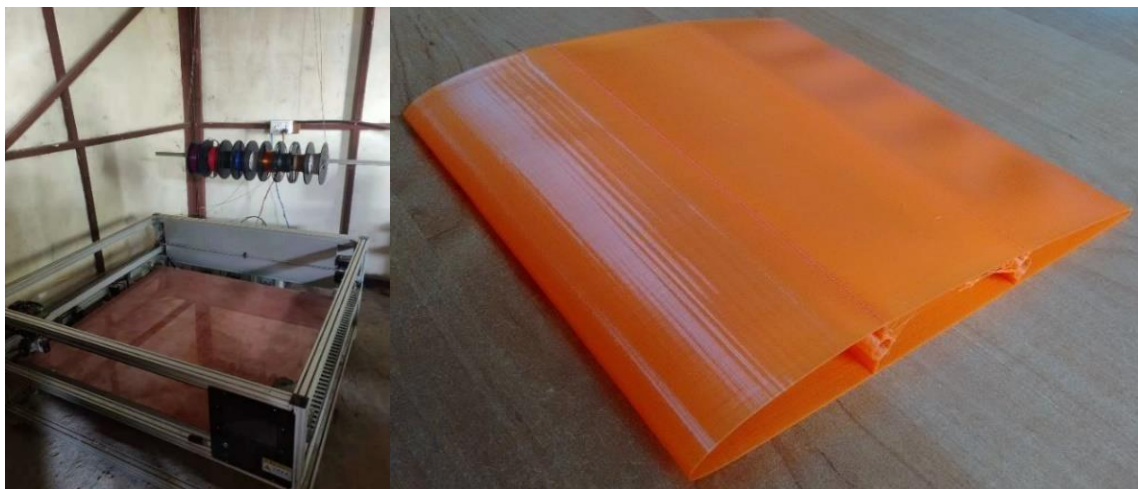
3d Printer machine with different coloured plastic rolls (on the left) and 3D wing section fabricated by 3D printer (on the right)
